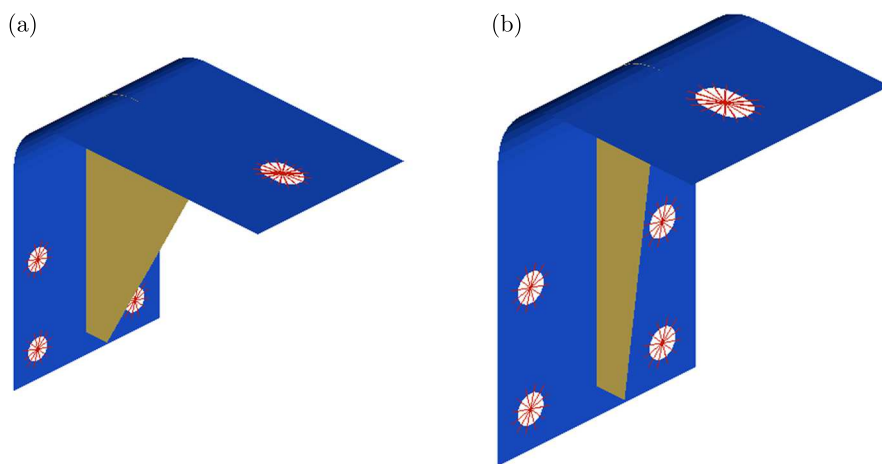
The finite element model of the bracket: (a) gearbox suspension bracket 1, (b) gearbox suspension bracket 2
